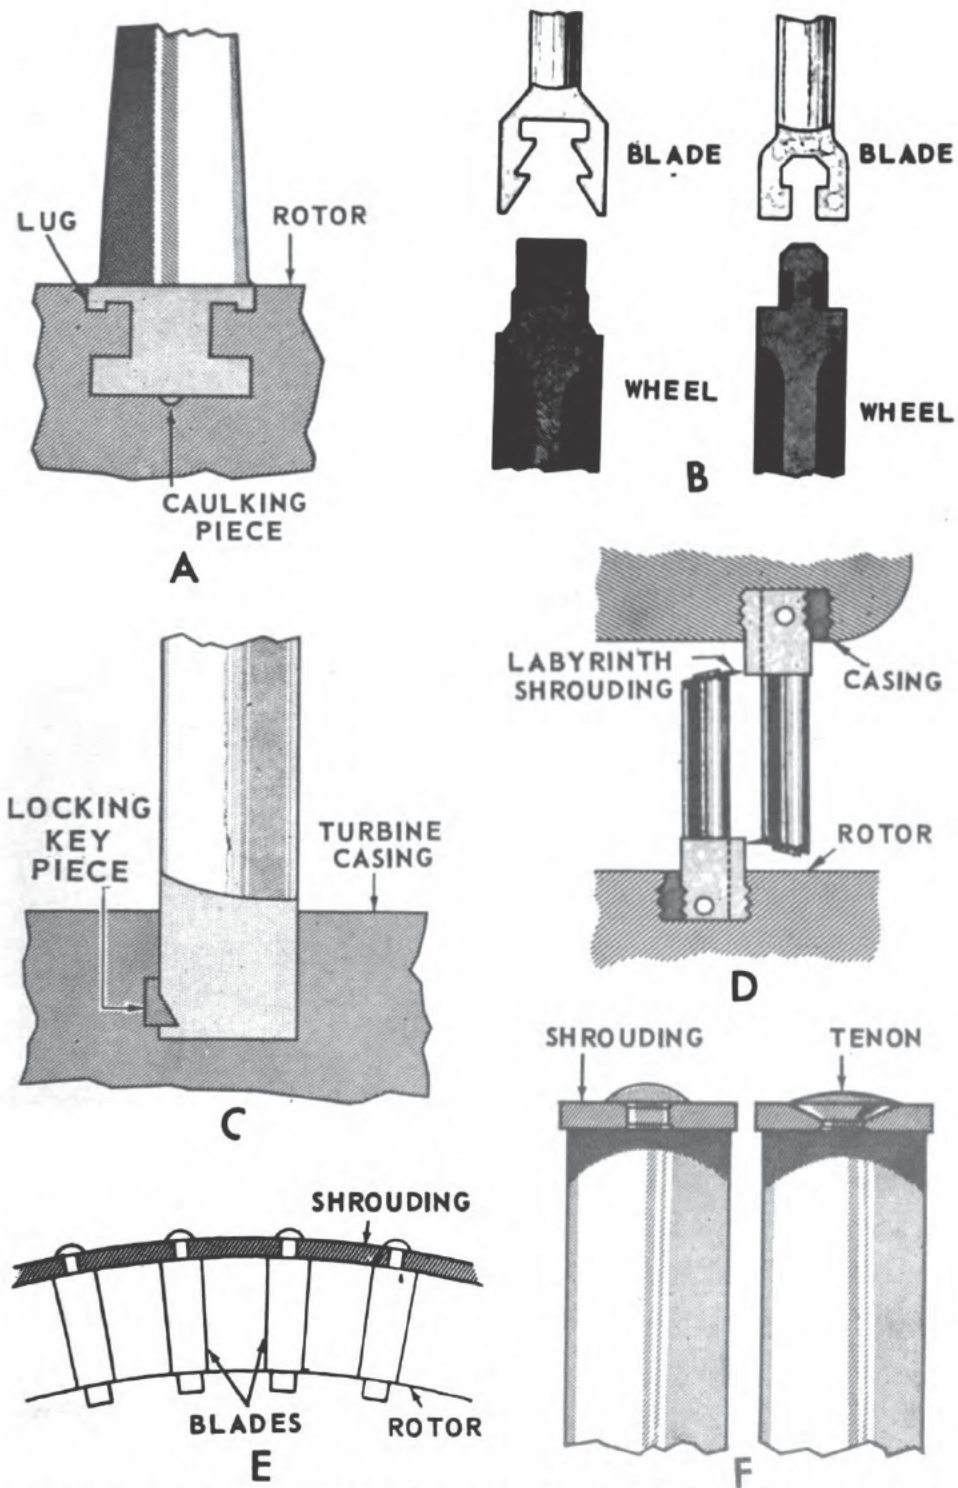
(A) Turbine blade secured by the straight circumferential dovetail method; (B) inverted circumferential dovetail methods of securing turbine blades (single and double shoulder types); (C) turbine blades secured by the side locking keypiece method; (D) turbine blades secured by the saw-toothed serration method; (E) turbine blade shrouding; and (F) methods of securing shrouding to blades.
